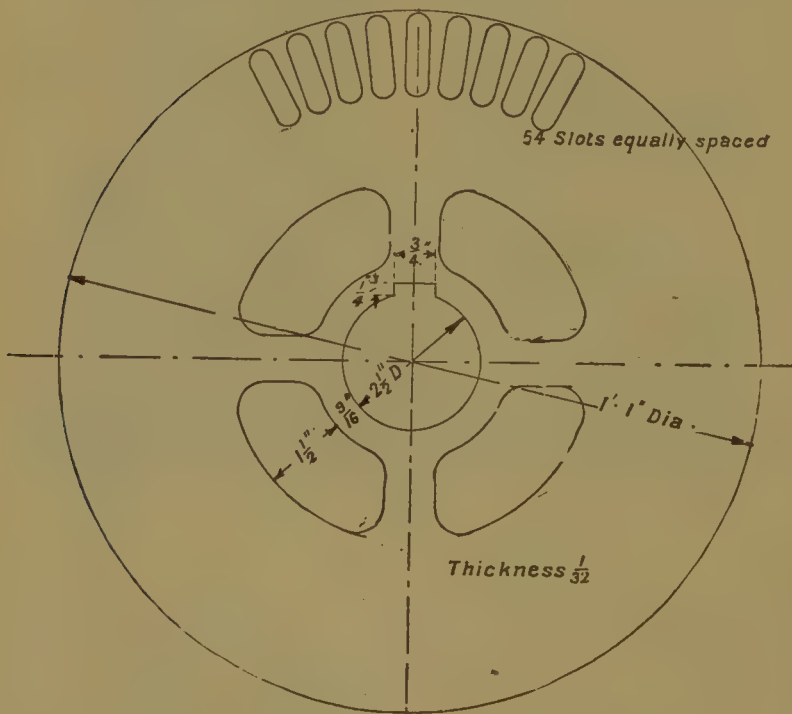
Rotor Stamping for 25 B. H. P. Induction Motor.
